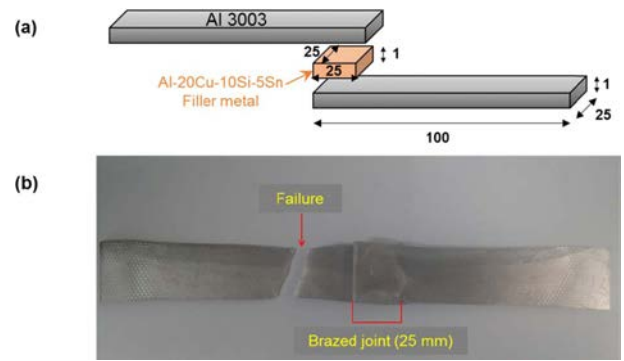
(a) Schematic information of tensile test specimen jointed by Al-20Cu-10Si-5Sn filler metal, (b) the result of tensile test and failure occurred in Al3003 plate.
